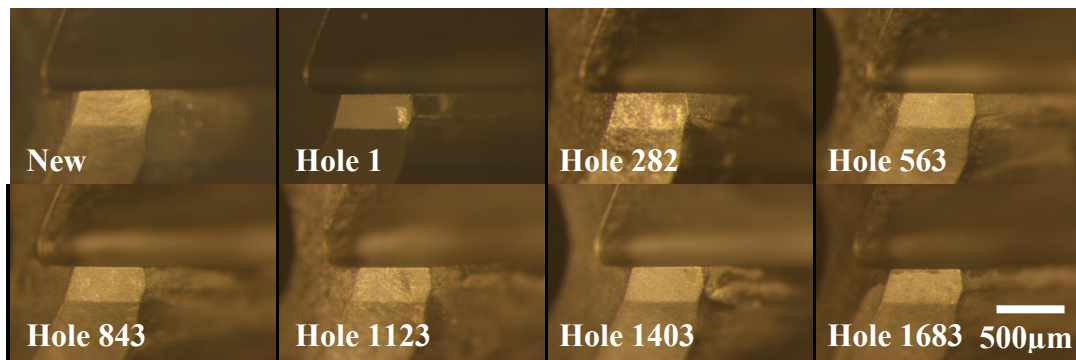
Tool wear micrographs of CVD diamond coated reamer under 70bar through-hole cutting fluid, 96m/min cutting speed (Test 4)
